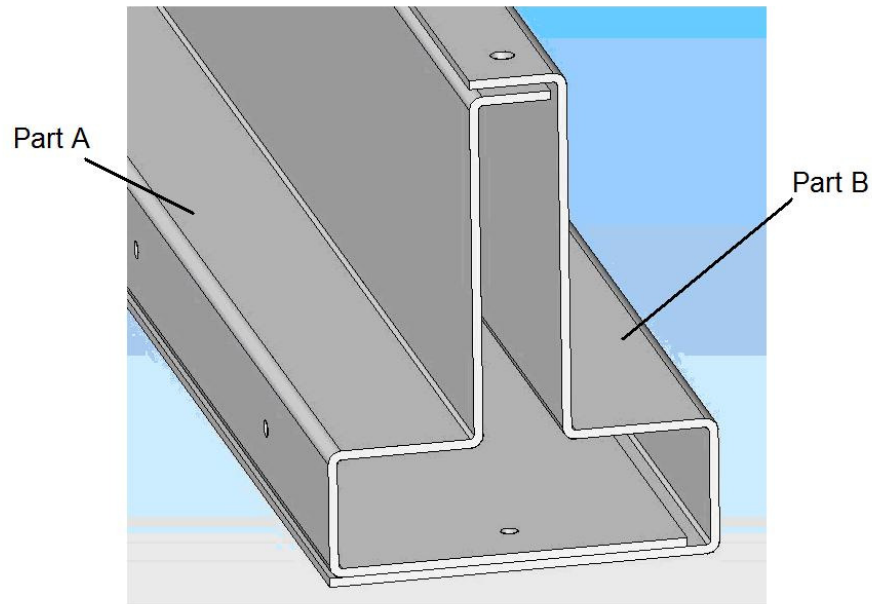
Cross section of saddle rail, the supporting component of floor grating sections showing parts A and B of the saddle rail assembly
